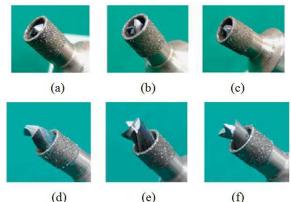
Distinctive type of core drills (a) Core-twist drill, (b) Coresaw drill, (c) Core-candlestick drill, (d) Step-core-twist drill, (e) Step-core-saw drill and (f) Step-core-candlestick drill
